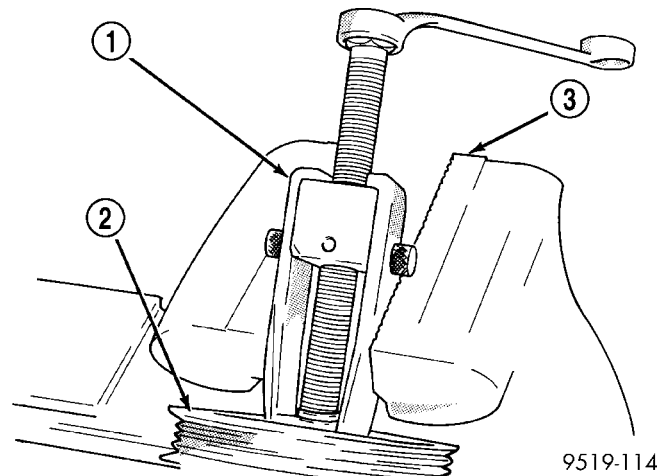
Removing Pulley From Power Steering Pump Shaft
